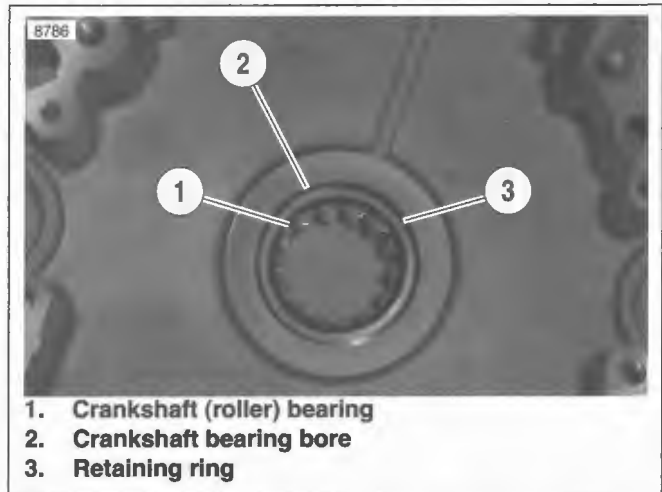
Left Crankshaft (Roller) Bearing Assembly
